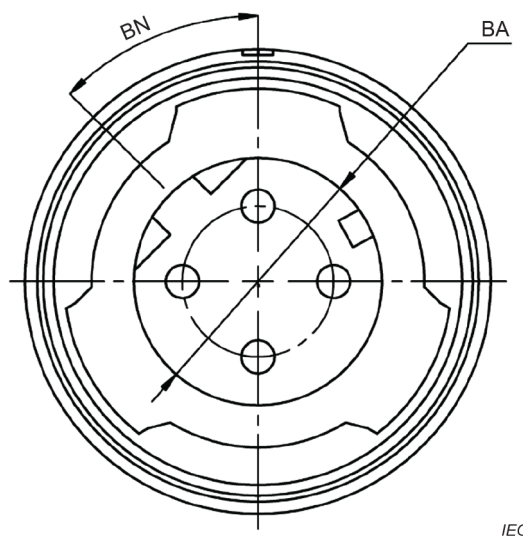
Front view of the female side of the push-pull housing for D-coding
